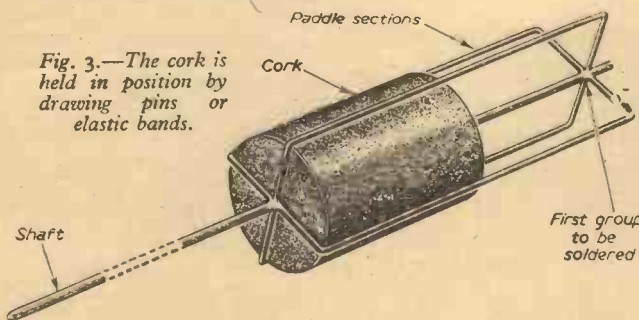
The cork is held in position by drawing pins or elastic bands.
